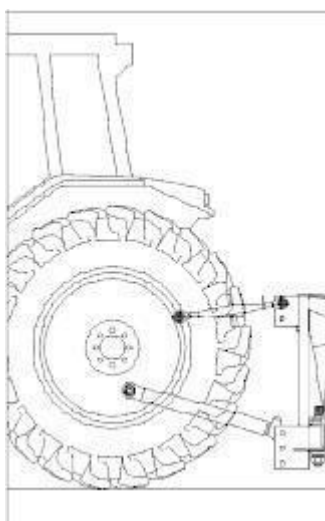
The top link must be higher on the machine side than on the tractor side!
